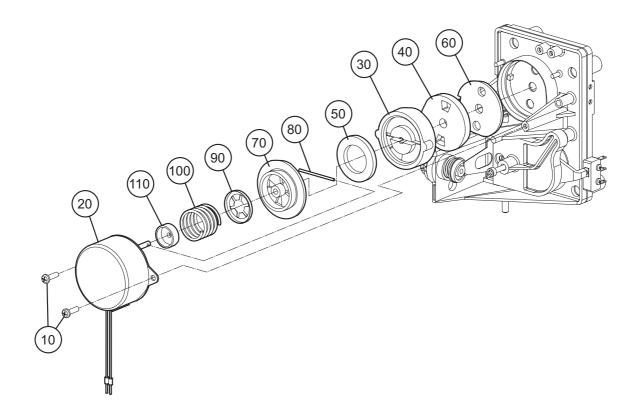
Synchronous Motor (Gearbox), Rotor/Stator Assembly
